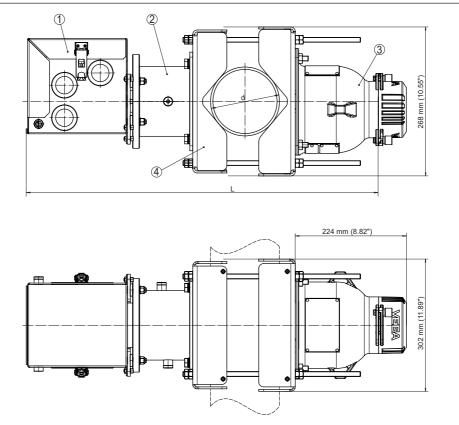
Mounting bracket with horizontally mounted sensor and air cooling (with VEGASOURCE 81, 82)
